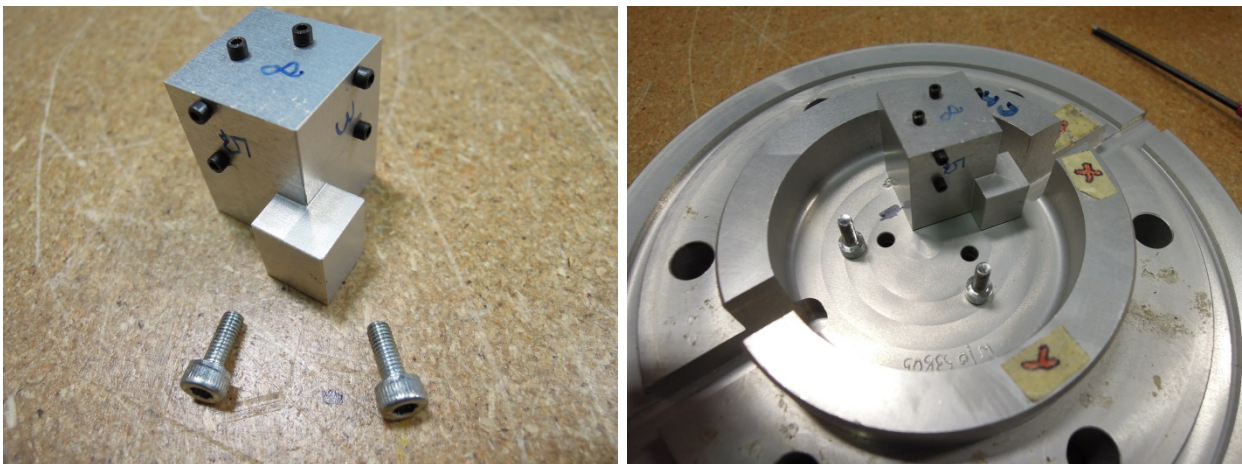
Positioning of the triaxial accelerometer mount block on the back plate assembly
